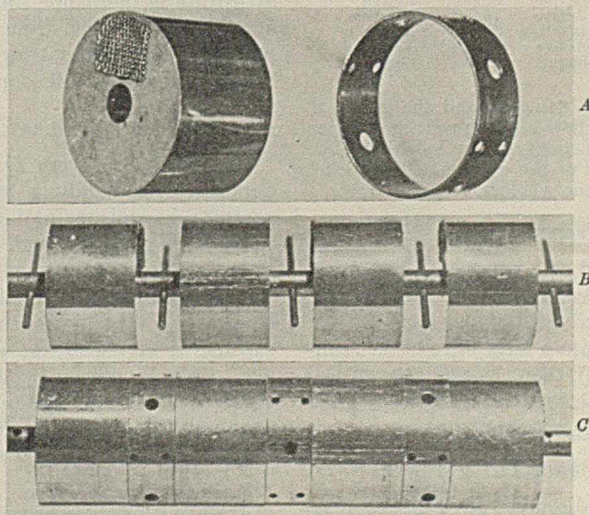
DETAILS OF COLUMN CONSTRUCTION
